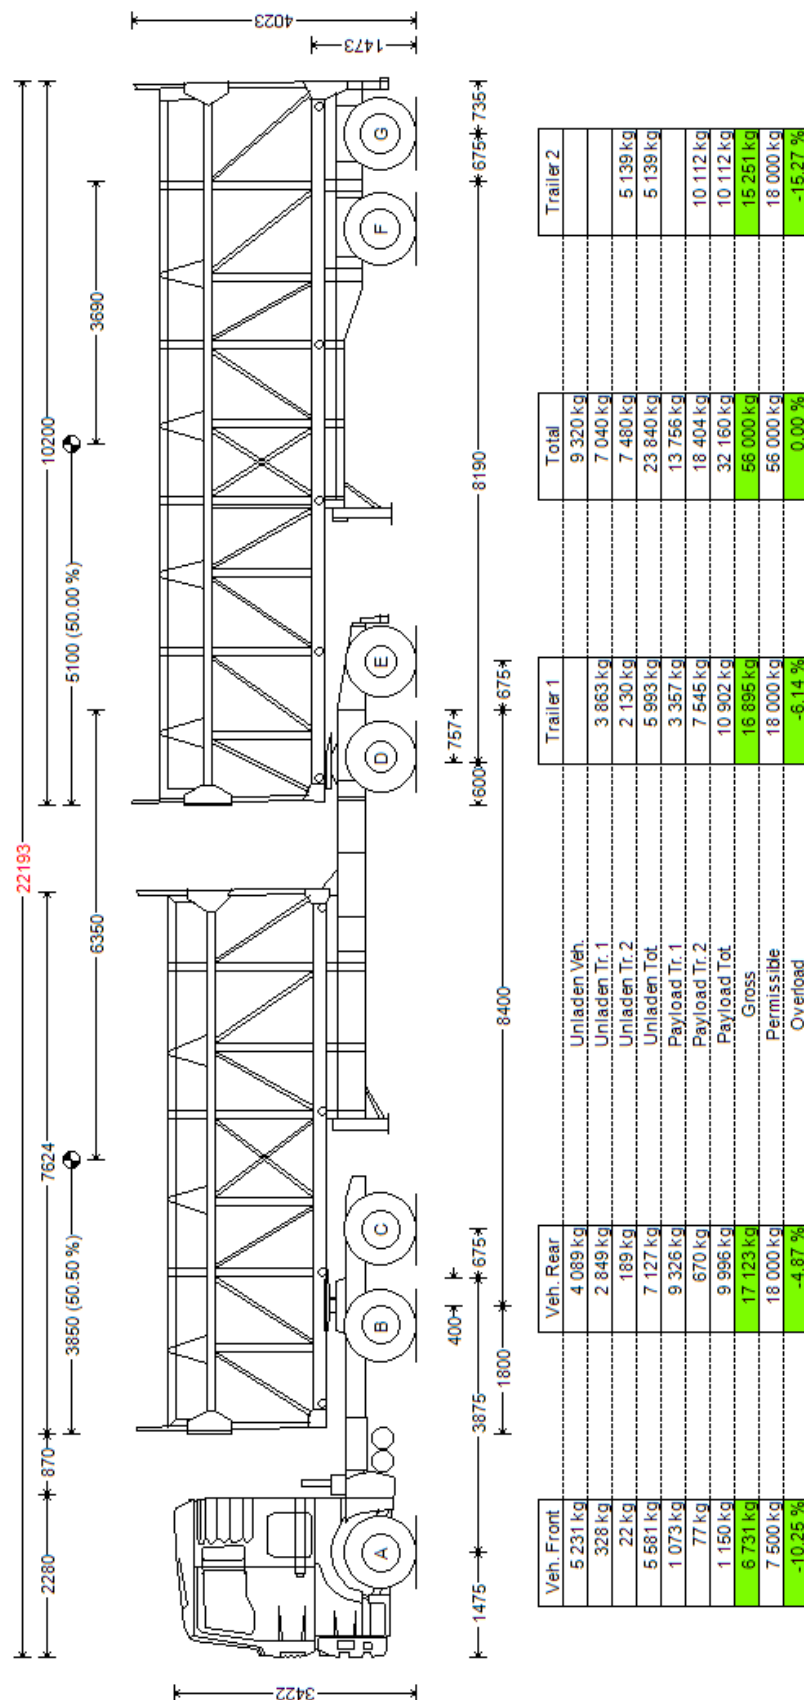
Layout dimensional drawing of the Cane B-double configuration
